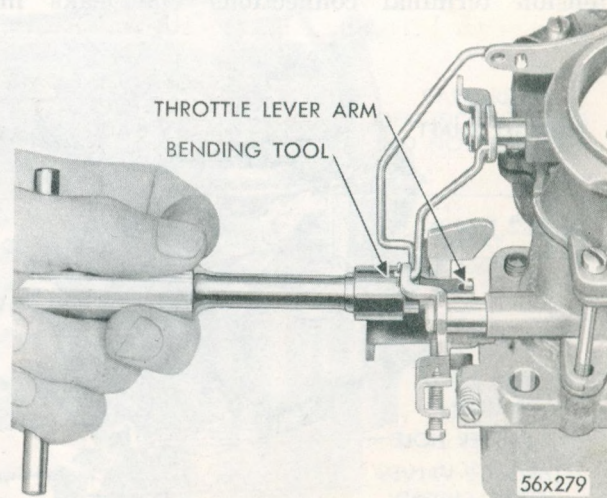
Bending Throttle Lever Arm for Unloader Adjustment
